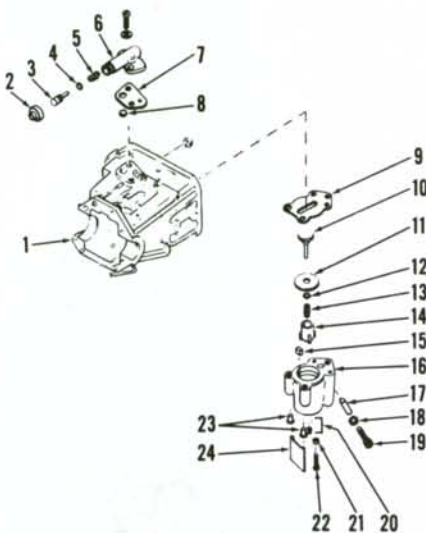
A—Exploded view of later type manual and automatic chain oil pump. Locknut (21) may be absent on some models.
